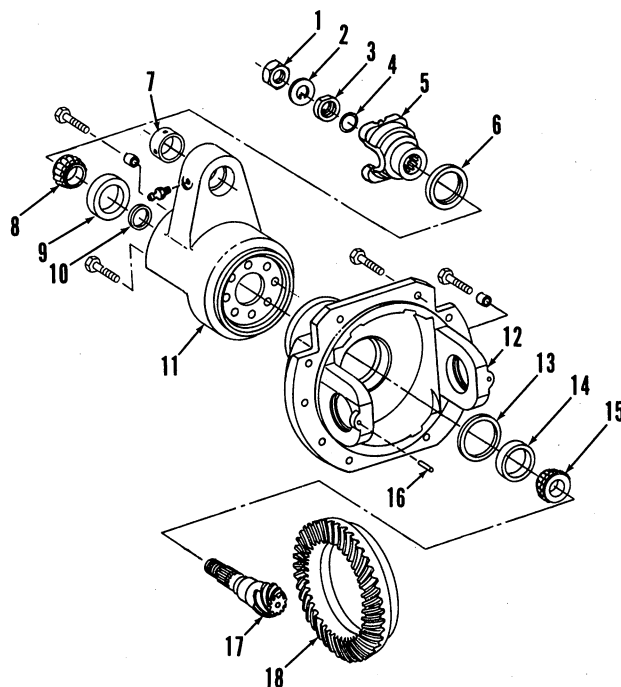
Exploded view of bevel ring gear and pinion and associated components. Pinion shaft cone point is adjusted by shims (13). Pinion shaft bearings are adjusted by tightening yoke retaining nuts to compress crush ring (10).
